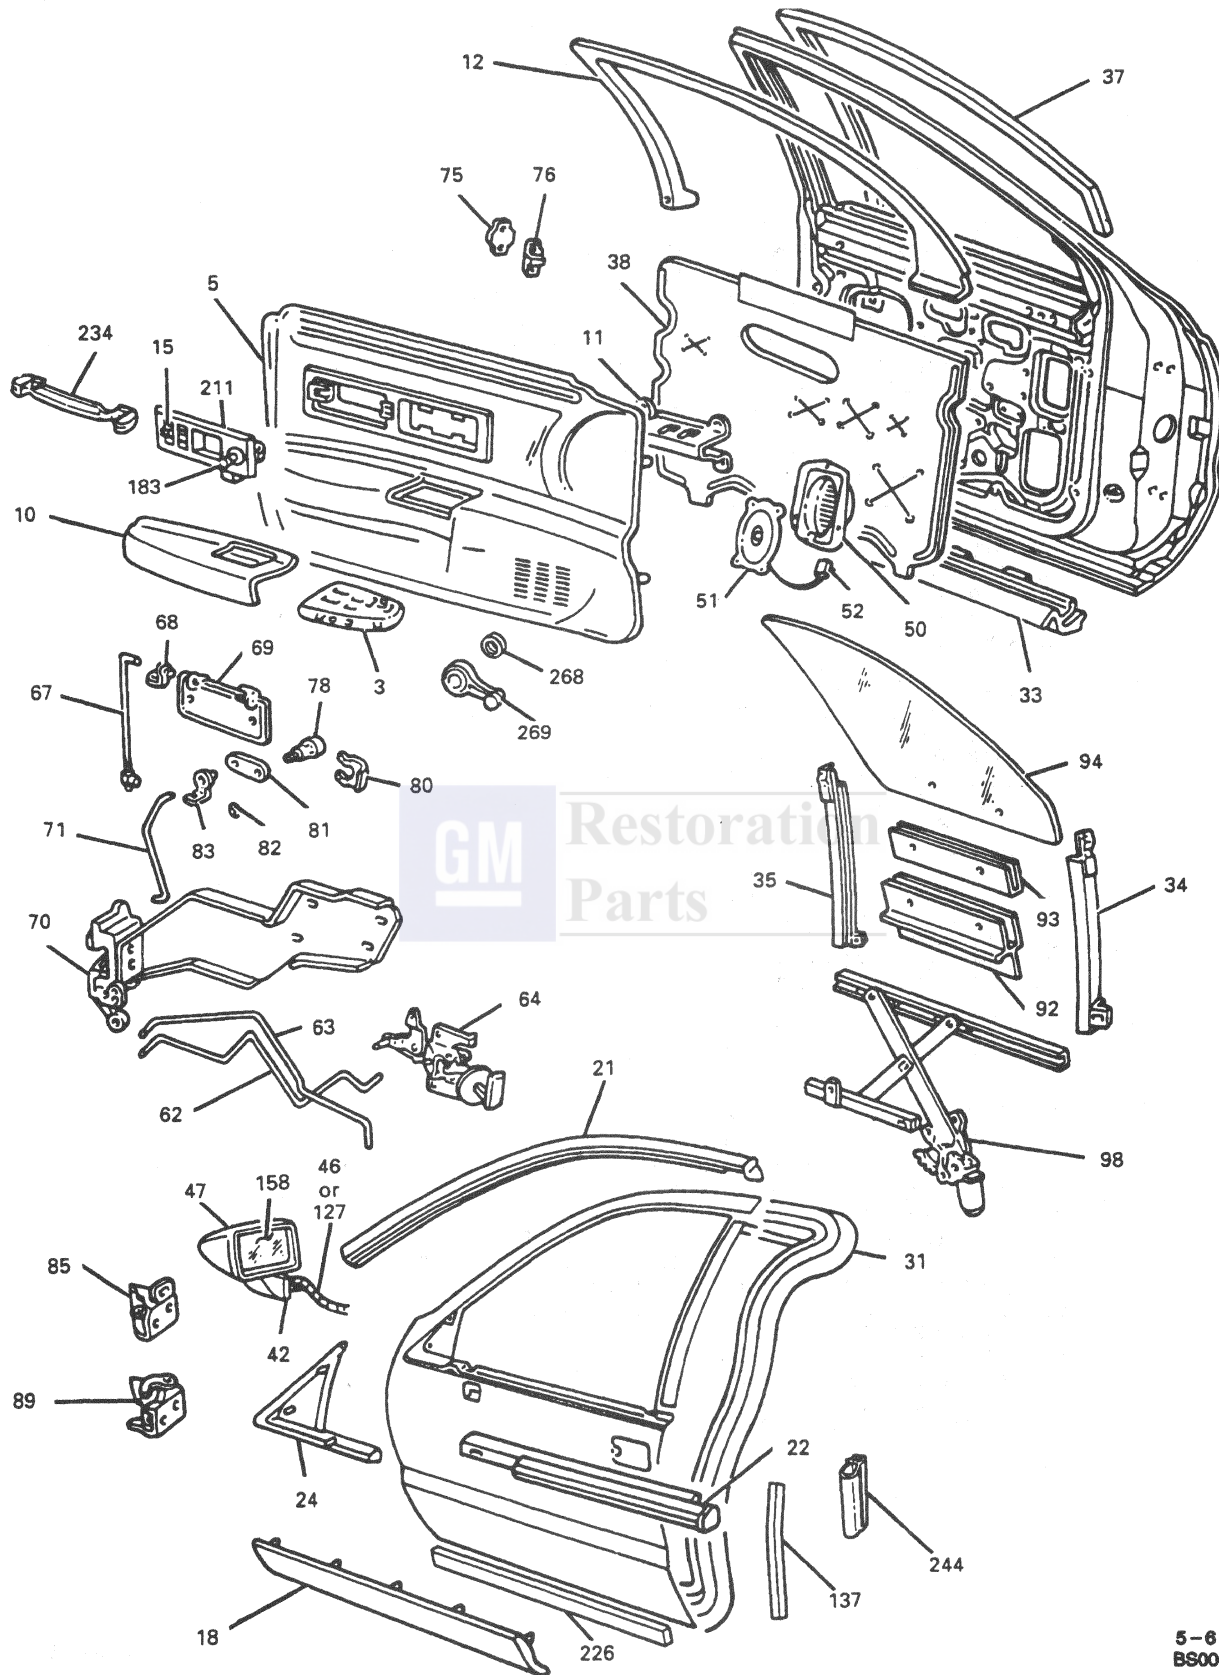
Front Side Door Components-(Chevrolet Sedan)
